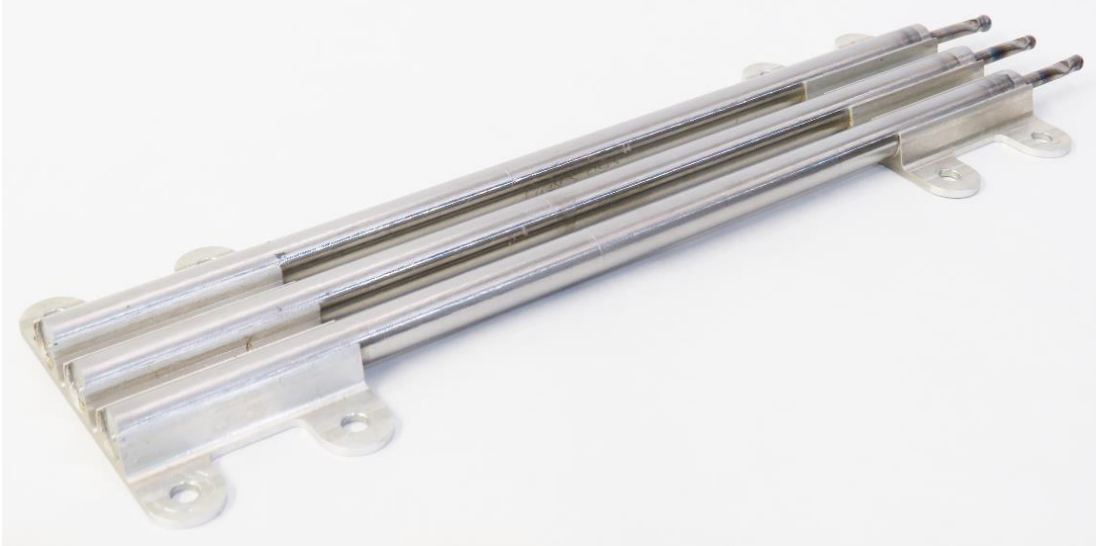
AM Heat Pipe Assembly Breadboard Test Piece (Titanium-Ammonia)
